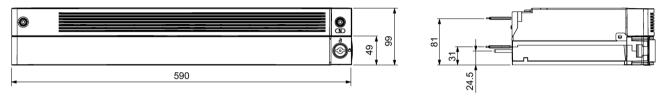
3NJ63 switch disconnector size 00, 4-pole, with motorized operating mechanism
